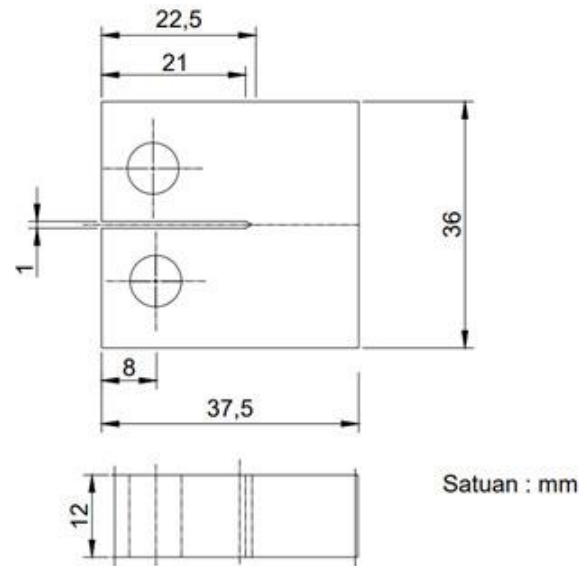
Dimensions of Crack Test Specimens based on ASTM Standard D 5405 [1-2].
